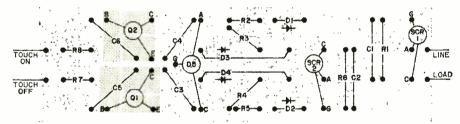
Actual-size PC board is very small so use care when making it. Unlike conventional boards, this board uses area contact rather than a pattern.
